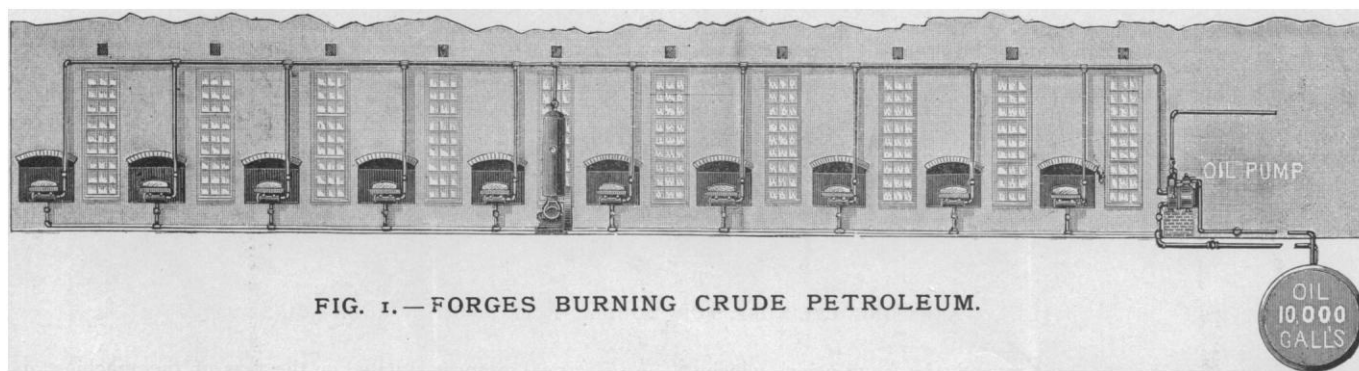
FORGES BURNING CRUDE PETROLEUM.
